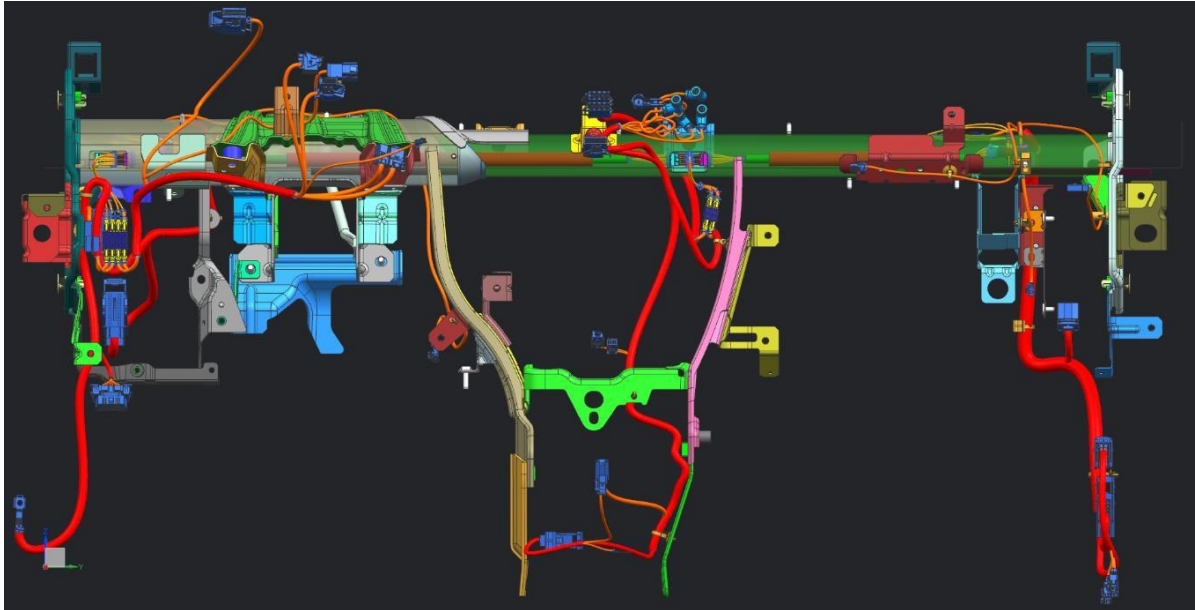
Cross-Car Beam structure and new cable guidance layout front-view
